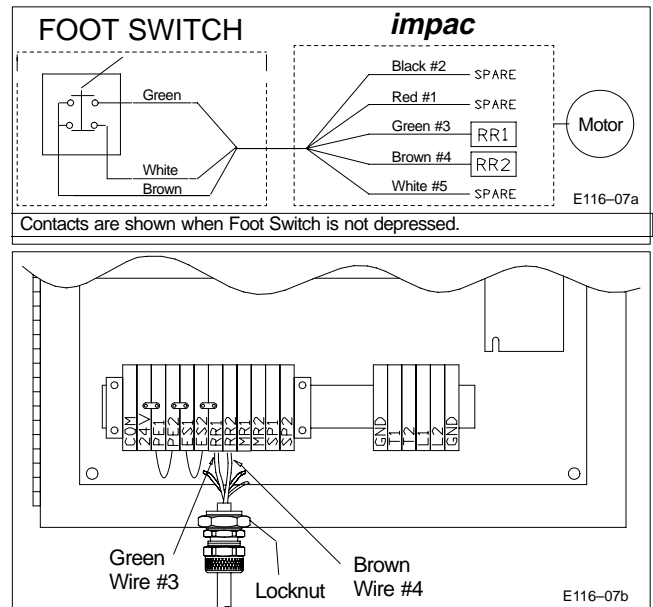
Sample Foot Switch to *impac* Wiring Connections
